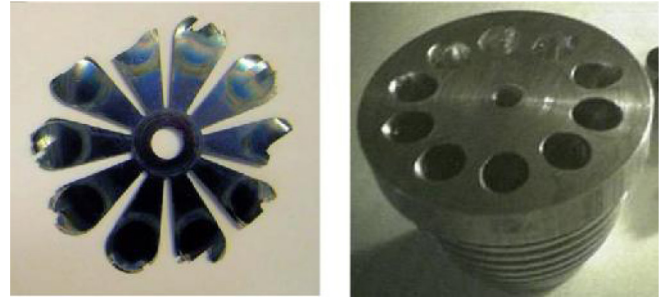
Image of failed valve (left) and the valve head (right) [13]
